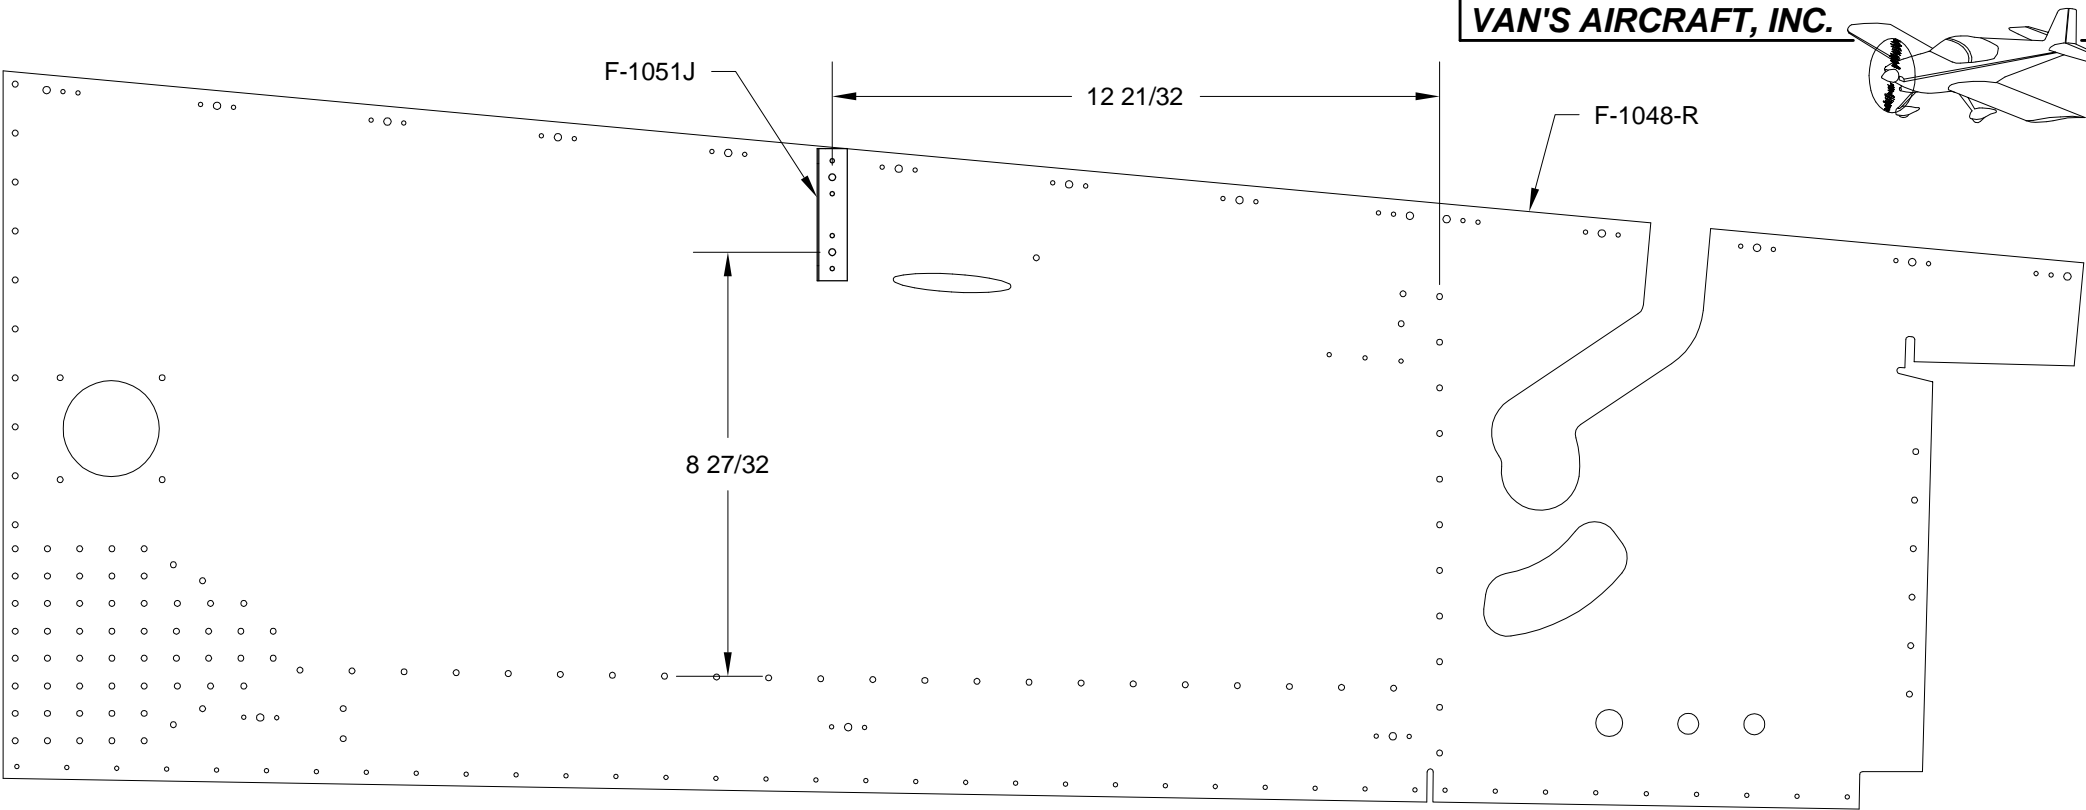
DRILLING THE F-1048-R FWD FUSELAGE RIB
